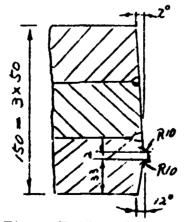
Unit cylinder and its circumferential weld groove
